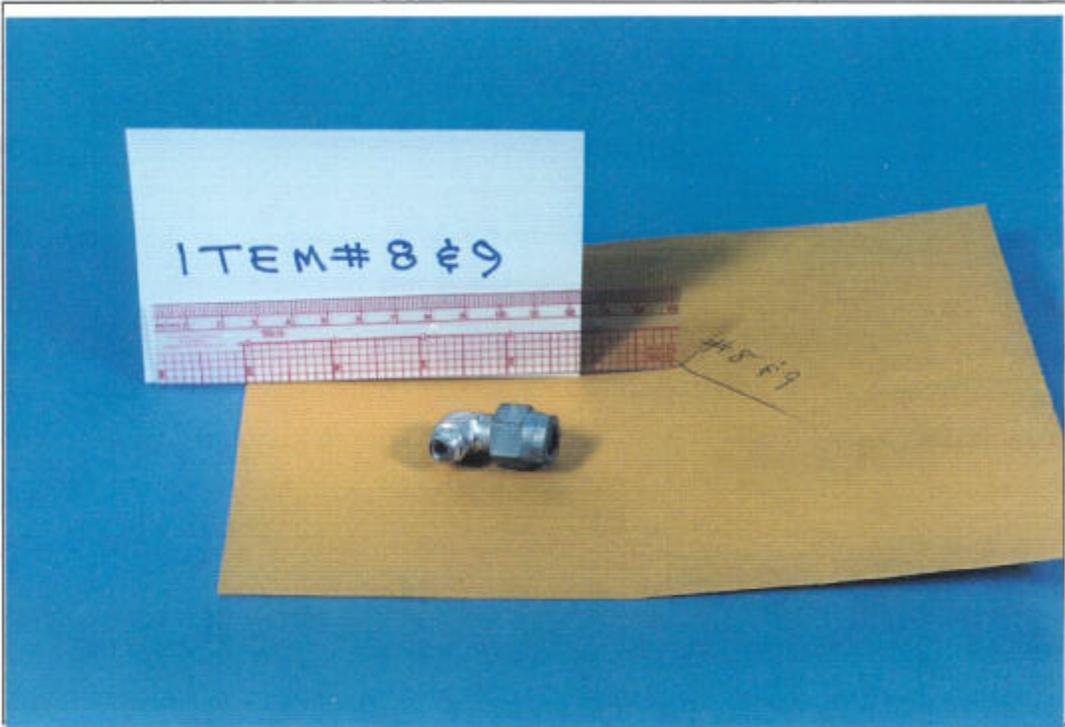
PIECES OF METAL RECOVERED FROM THE RUPTURED CYLINDER --
